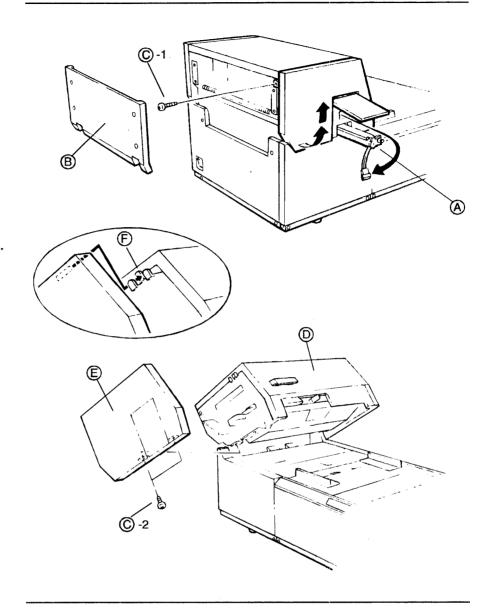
Removing Front Cover of IS520 Upper Unit
